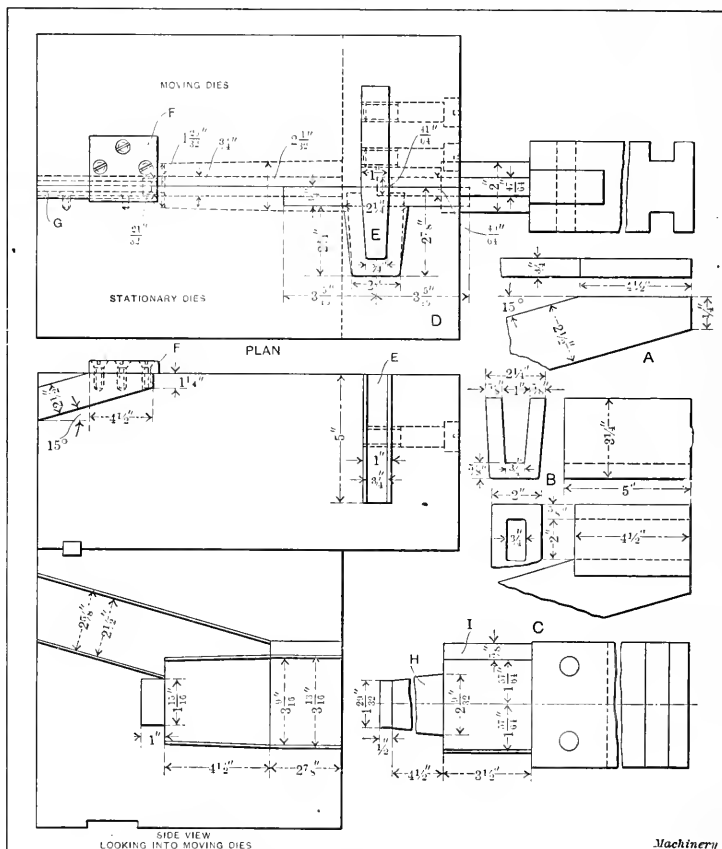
Forging Machine Dies and Tools for making Extension Handles for Grate Shaking Levers
